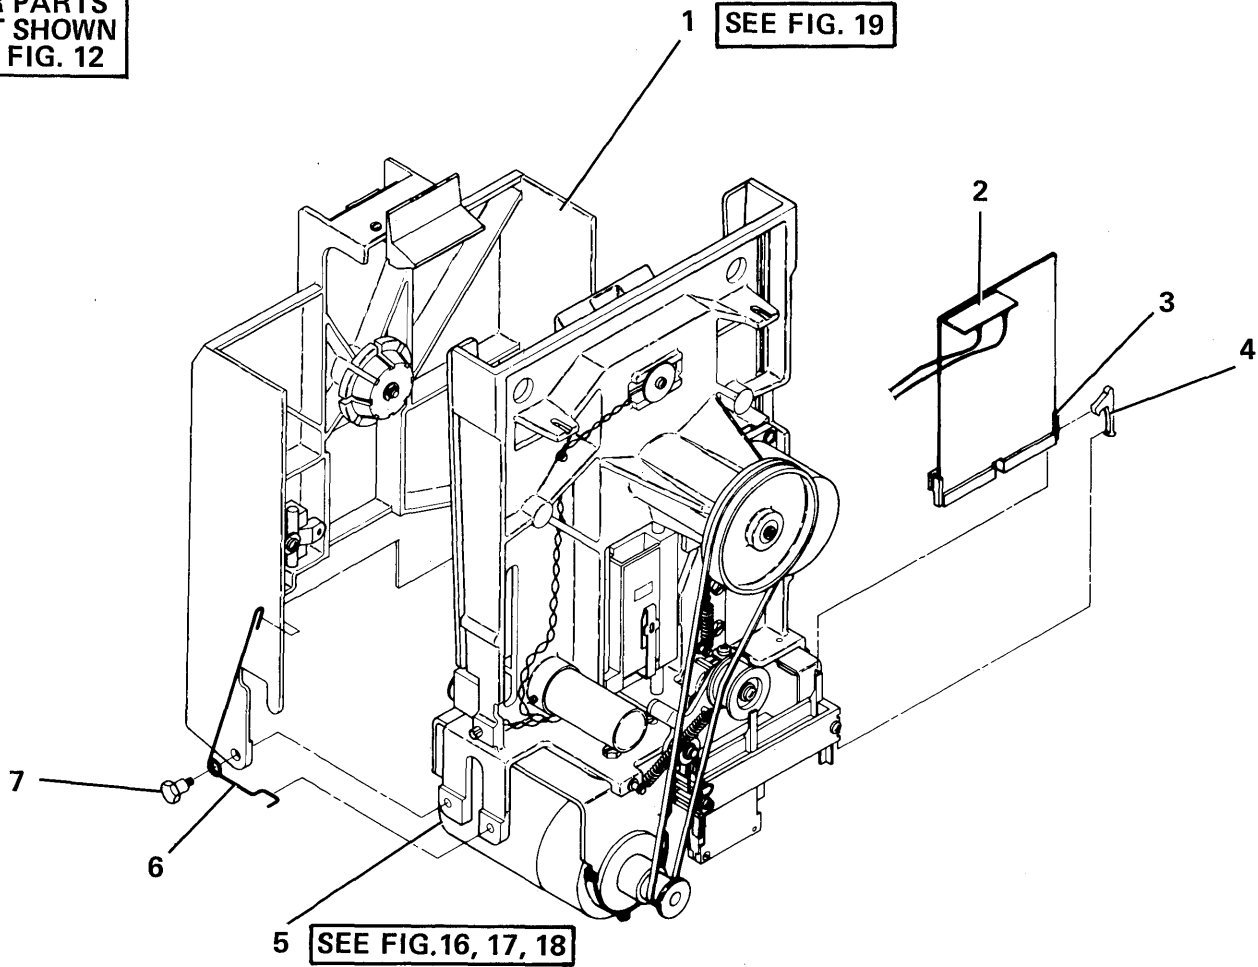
DISK DRIVE ASSEMBLY. SEE LIST 15.
